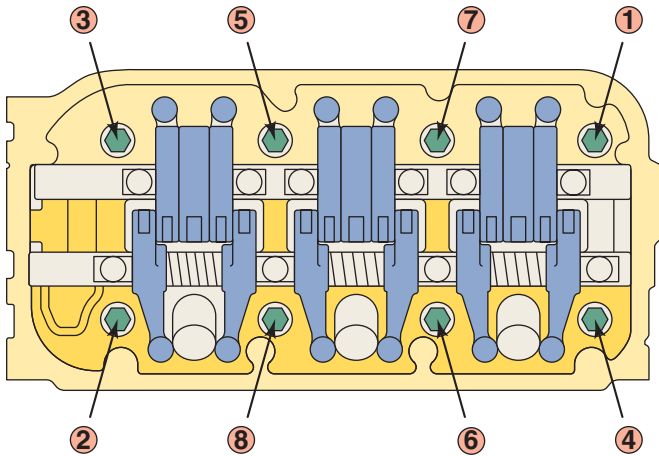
When loosening cylinder head bolts, follow the sequence given by the manufacturer.
